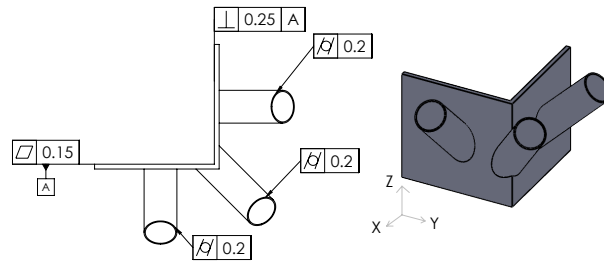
Example flagpole bracket part with specified geometric tolerances.
